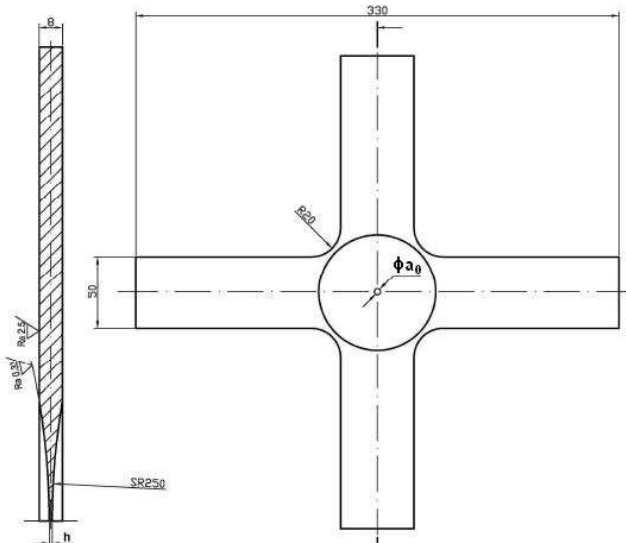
Specimen for tests of fatigue crack growth, dimensions in mm
